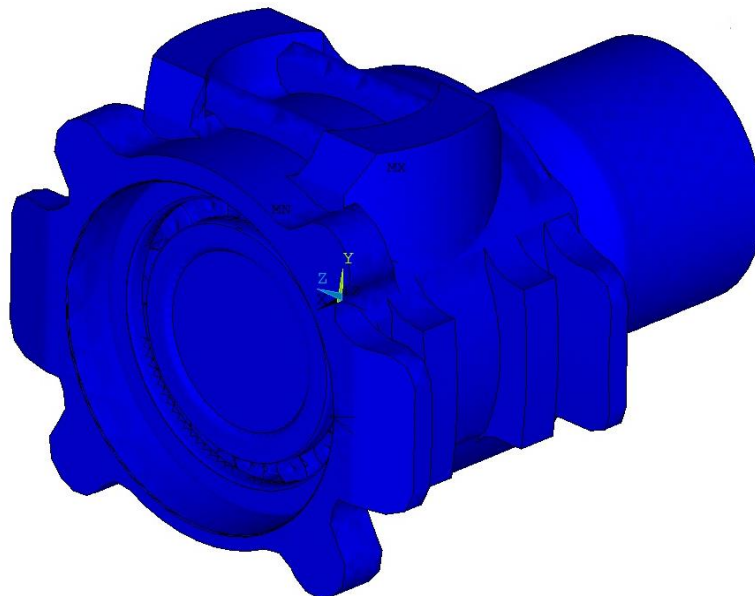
General view of an axle box bearing assembly with a double cylindrical bearing
